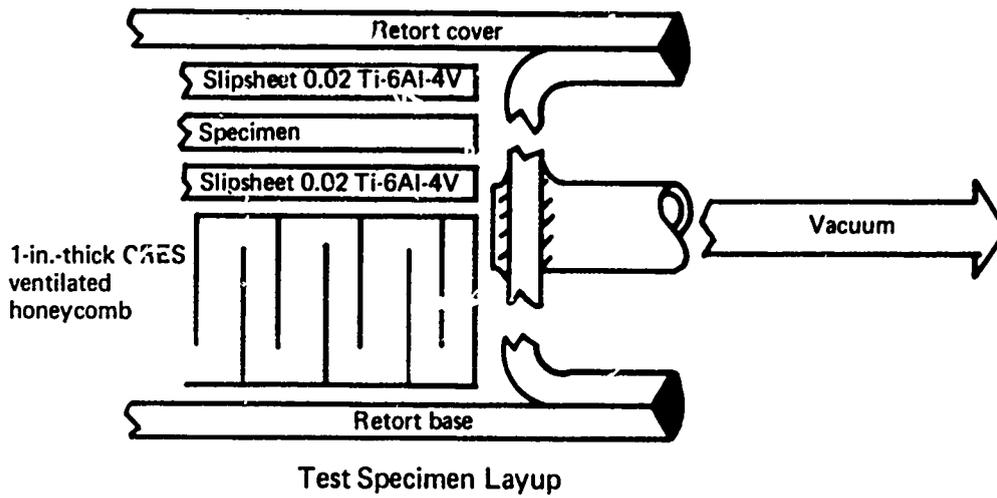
TYPICAL VACUUM RETORT ASSEMBLY FOR ELEVATED-TEMPERATURE HYDROGEN REMOVAL
